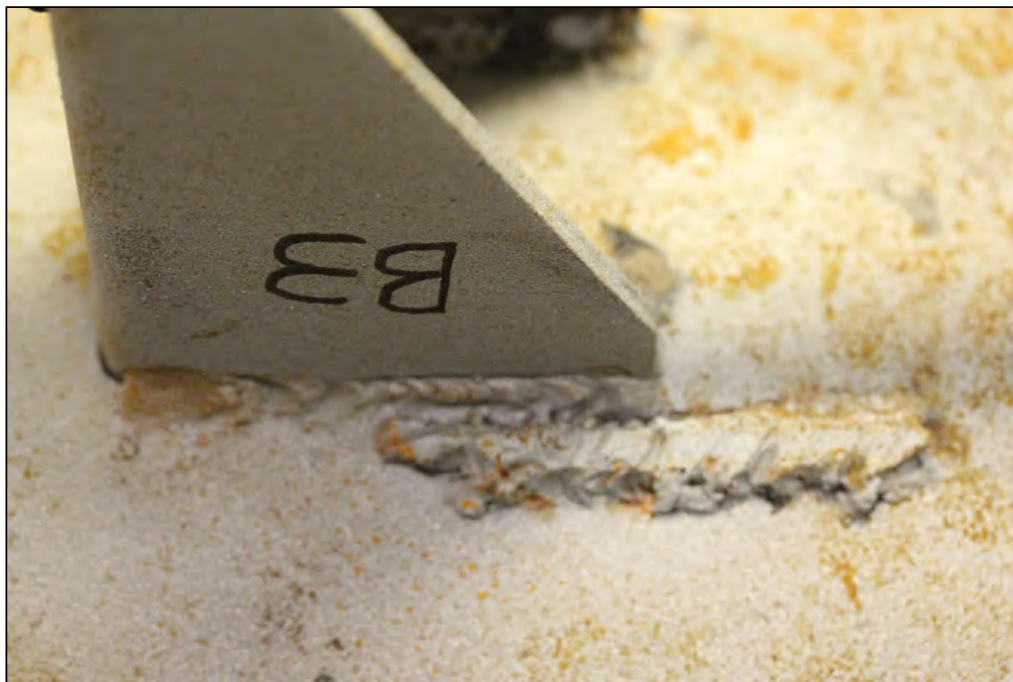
Image of the Lug B3 weld showing the remainder of a weld adjacent to the primary weld.
